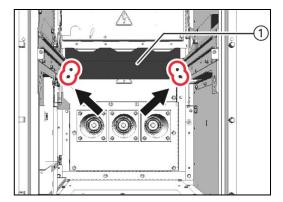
4 bolted joints on protection plate of switching-device compartment
